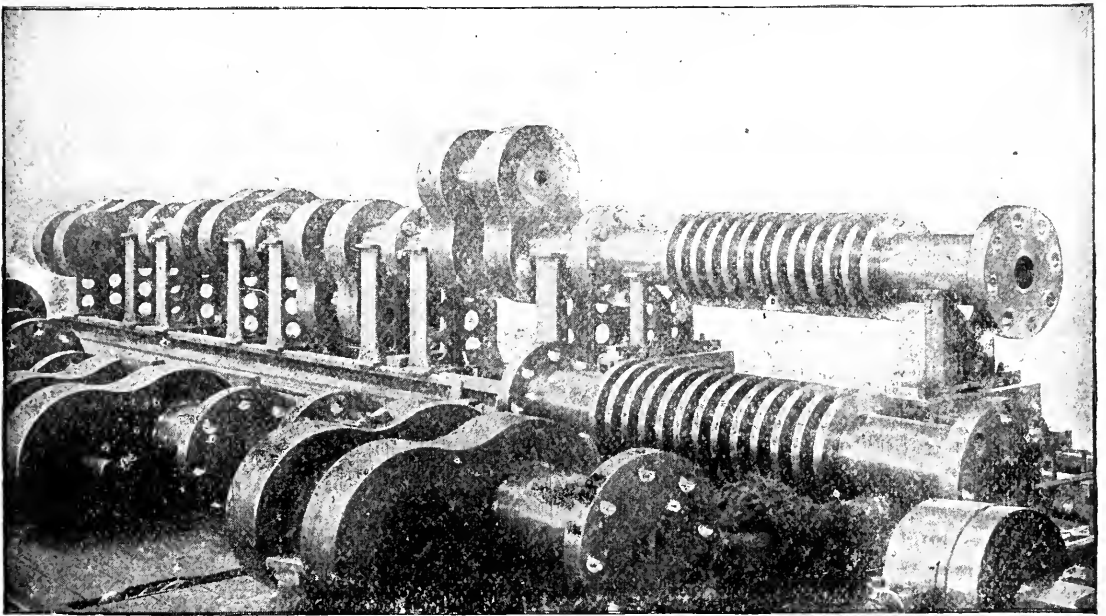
Crank and Thrust Shafts for Steamers "St. Louis" and "St. Paul." Diameter of shaft, 21 in.; diameter of pins, 22 in.
